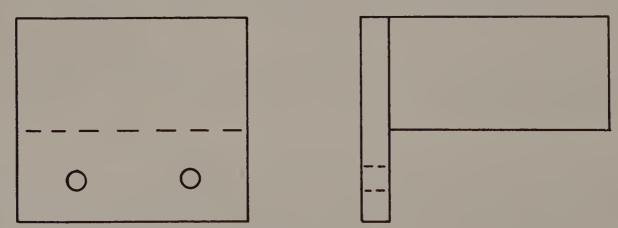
A doweling jig aids in the layout of many identical joints.
